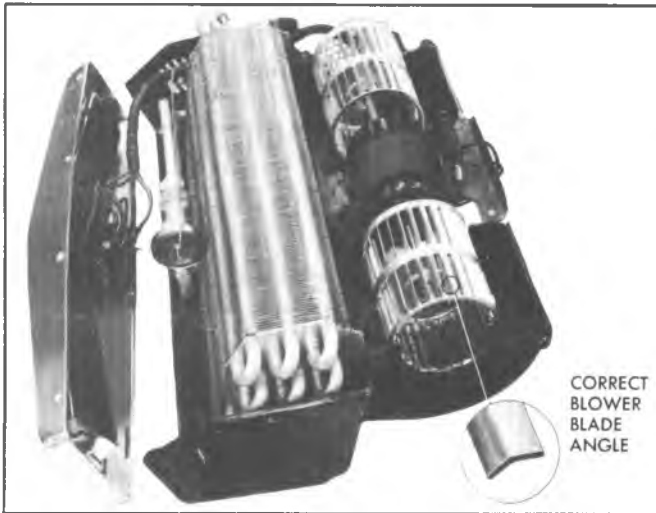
B-71--Blower Assembly (Motor Home Chassis Unit)
